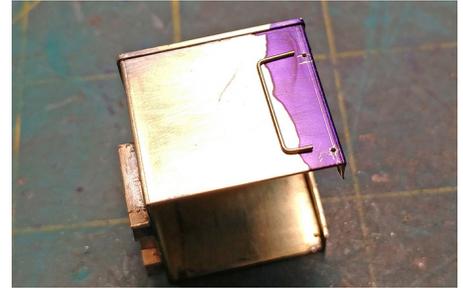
Here mounting holes were marked and drilled for the tender's grab irons. If you look closely you will note that I drilled the holes slightly too far apart. I didn't discover this until later.
